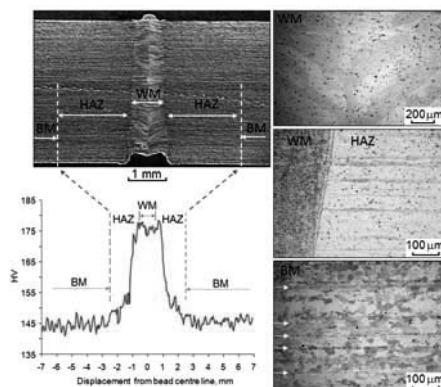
Morphology and hardness profile of EB weld of V-4Ti-4Cr versus welding zones: weld metal (WM), heat affected zone (HAZ) and base metal (BM).
